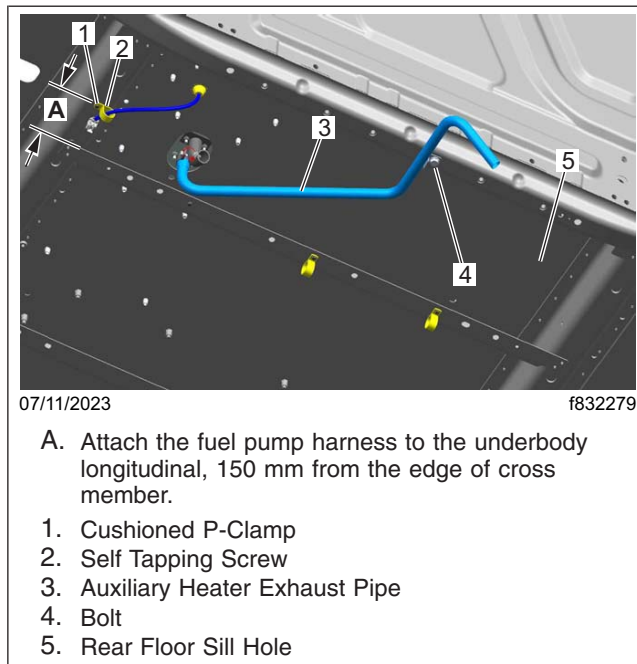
, Auxiliary Heater Exhaust Pipe Installation
